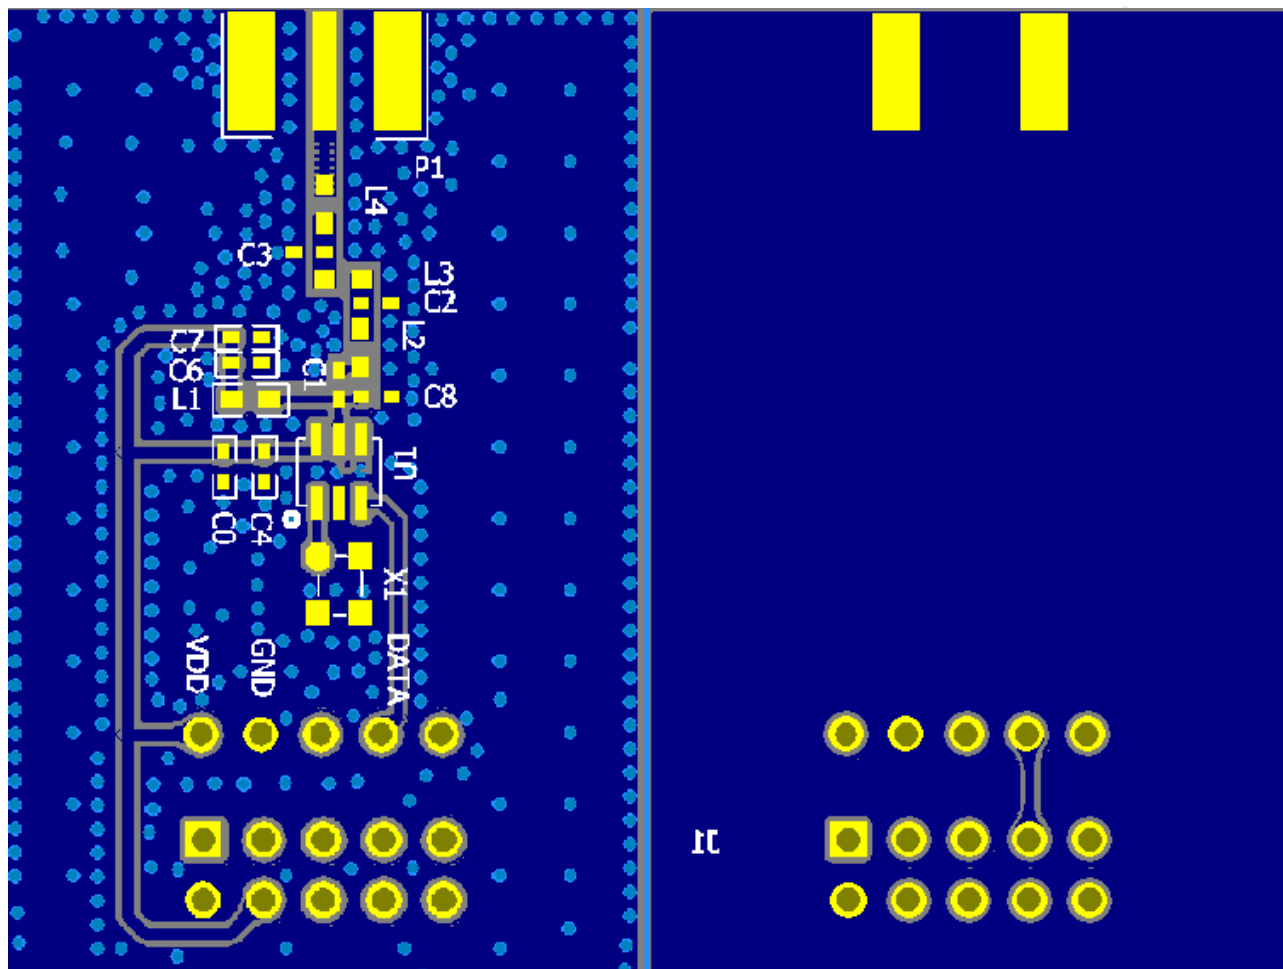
CMT211 CMT2110B/17B-EM PCB Layout
